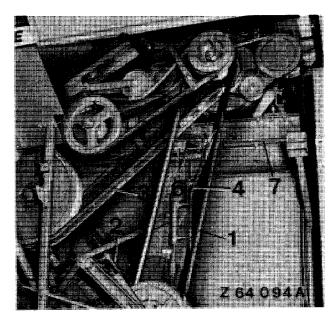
Preparing to Remove Engine (Combines with Variable Ground Speed Drive)
